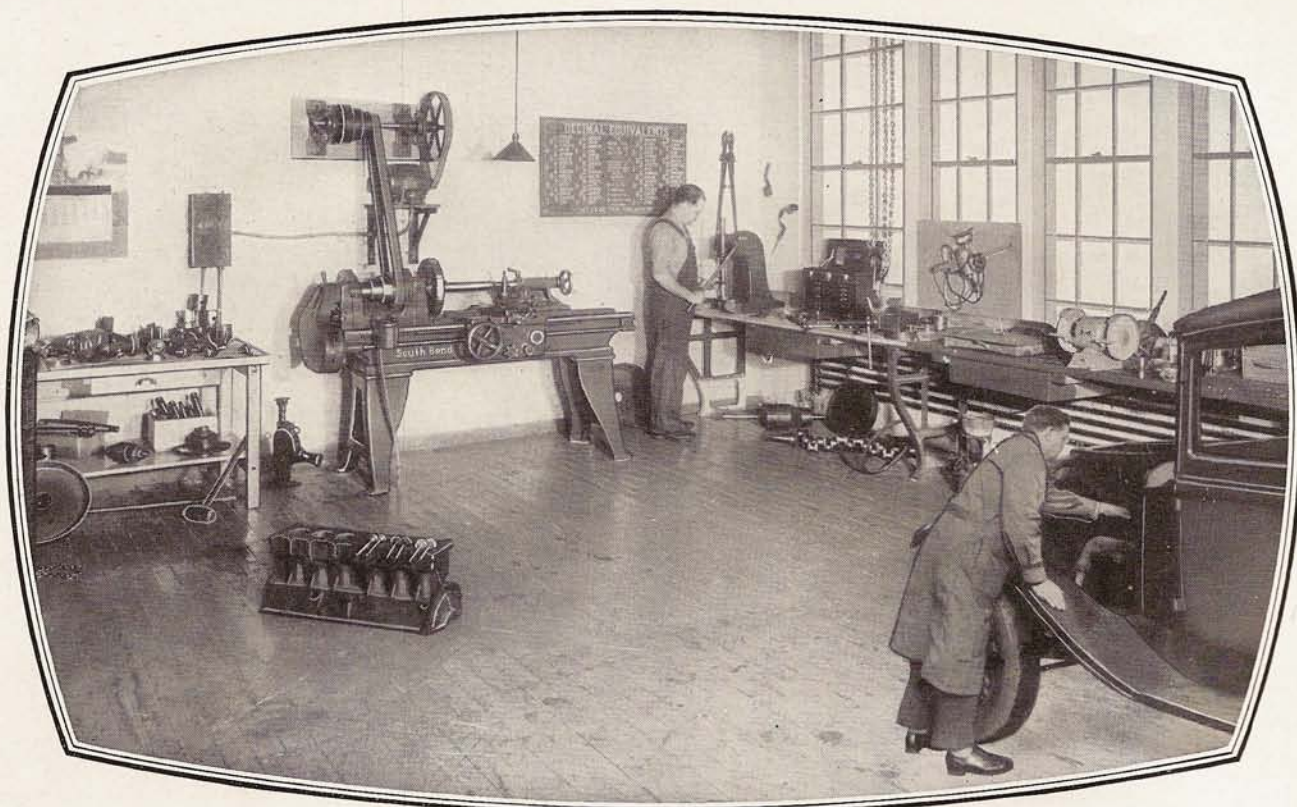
An Enlarged View of the Motor Service Machine Shop Shown on the Front Cover.
